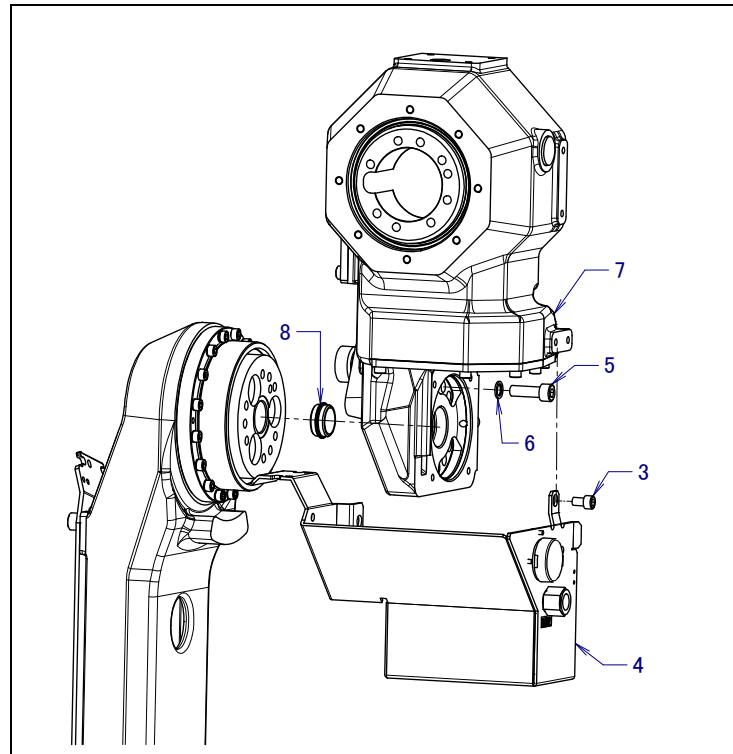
(c) Replacing the J4-axis gearbox unit (3/4)
